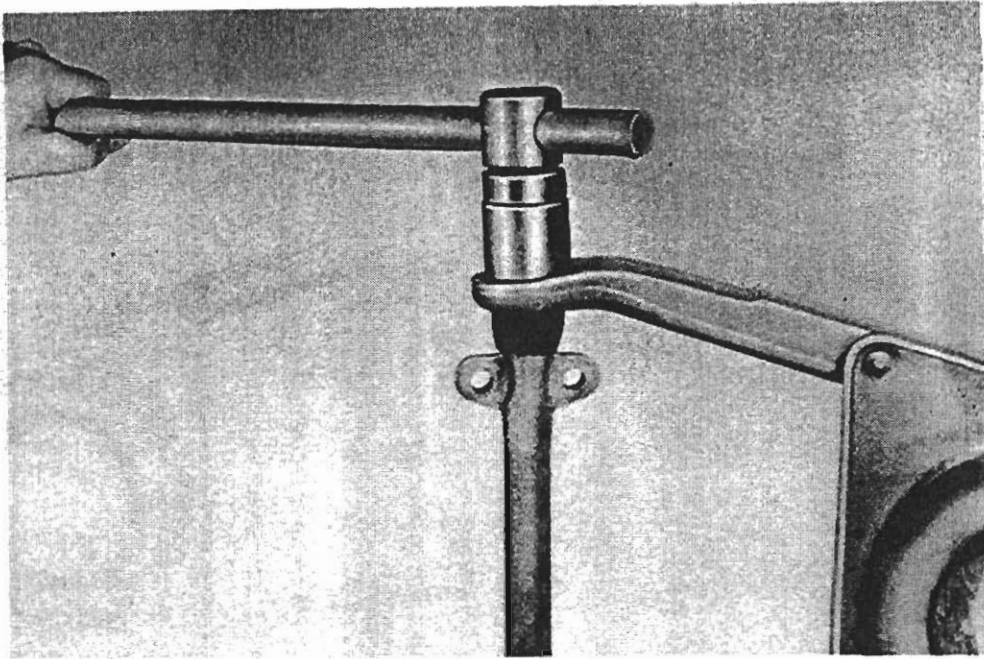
The Bushings May Be Removed From the Support Arm Using Socket Wrench and Handle J-2571-A.
